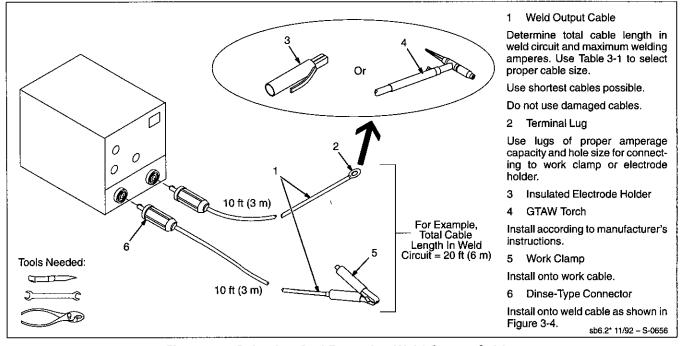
Selecting And Preparing Weld Output Cables
